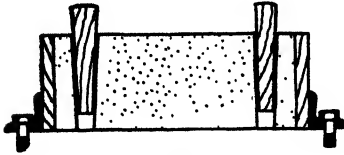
Removing the Cope and Drawing the Pattern.
